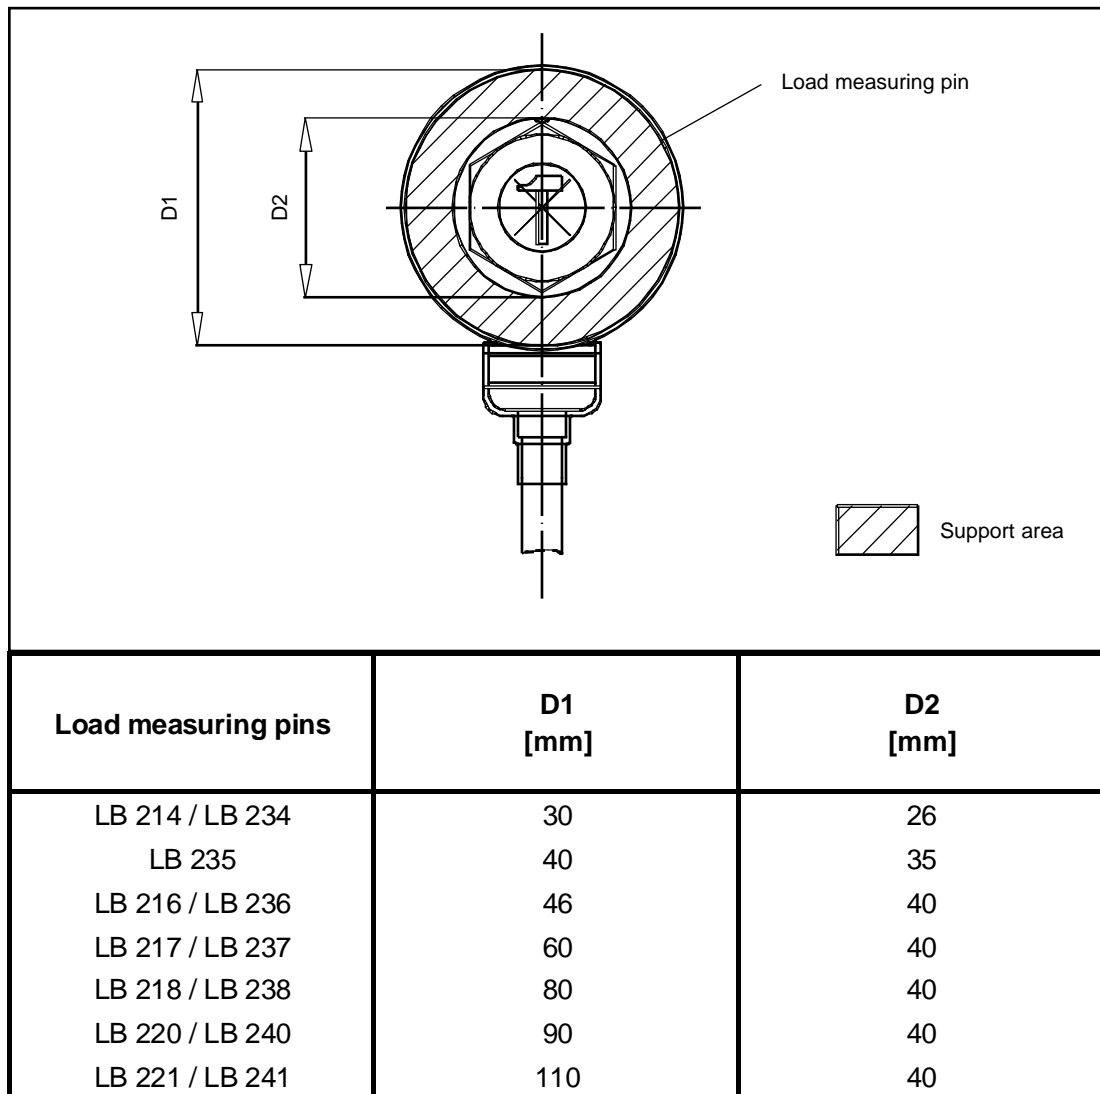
Support area on the end of the load measuring pin for a sleeve tube or a muff.
